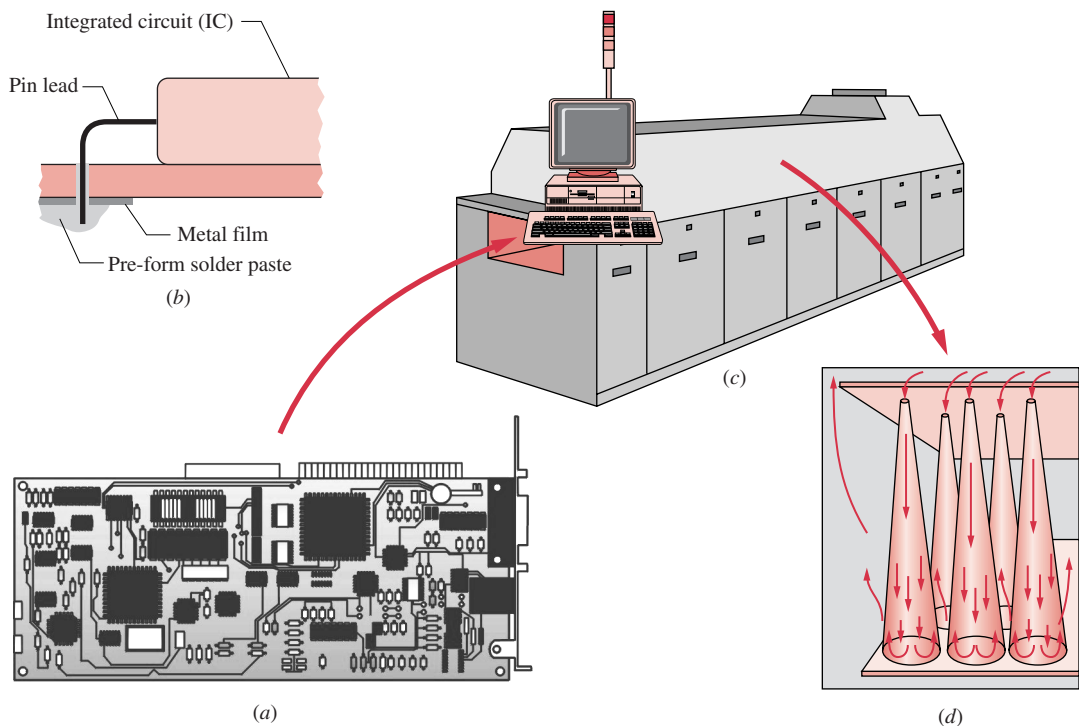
Soldering printed-circuit boards (a) with pre-form solder paste applied to integrated circuit pins and terminal pads (b) enter the solder-reflow oven (c) on a conveyor and are heated to the solder melting temperature by impinging hot air jets (d).
